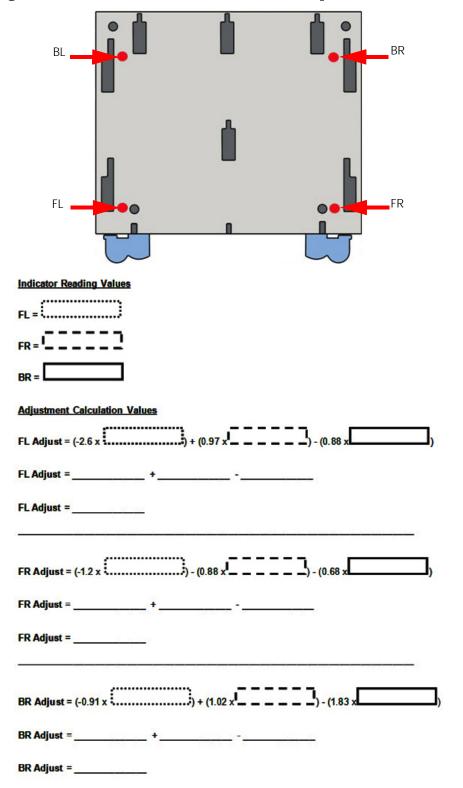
uPrint and uPrint SE measurement points and worksheet
